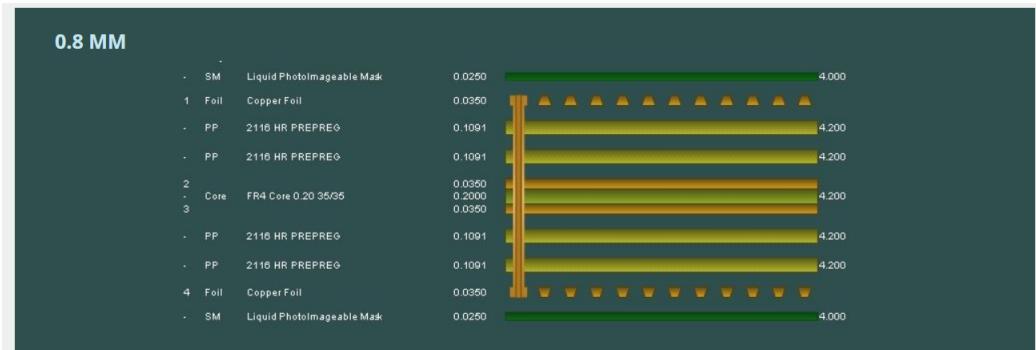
PCB Train's 4 Layer 0.8mm Layer Stack
